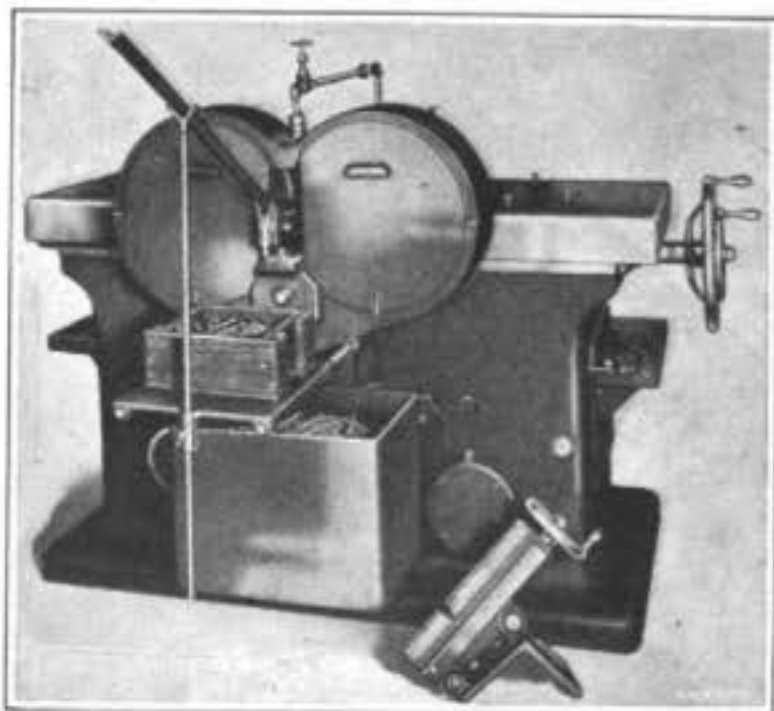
Heim Centerless Roll Grinder made by Ball & Roller Bearing Co.
